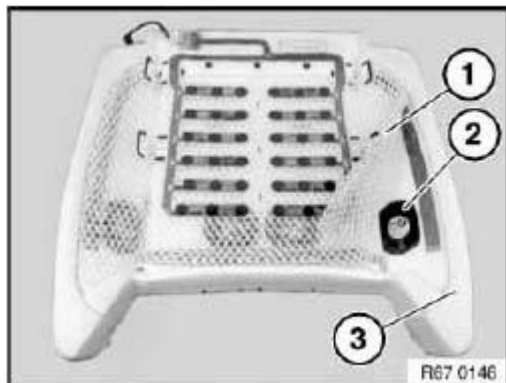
Identifying Dividing Net, Seat Surface And Seat Padding
